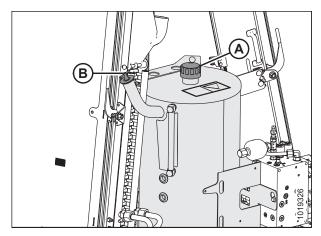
Hydraulic Oil Filler Neck and Breather Tube
